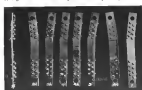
The fractured specimens after an experiment in riveted joint failure. Tensile loads were applied to the ends of the samples.
